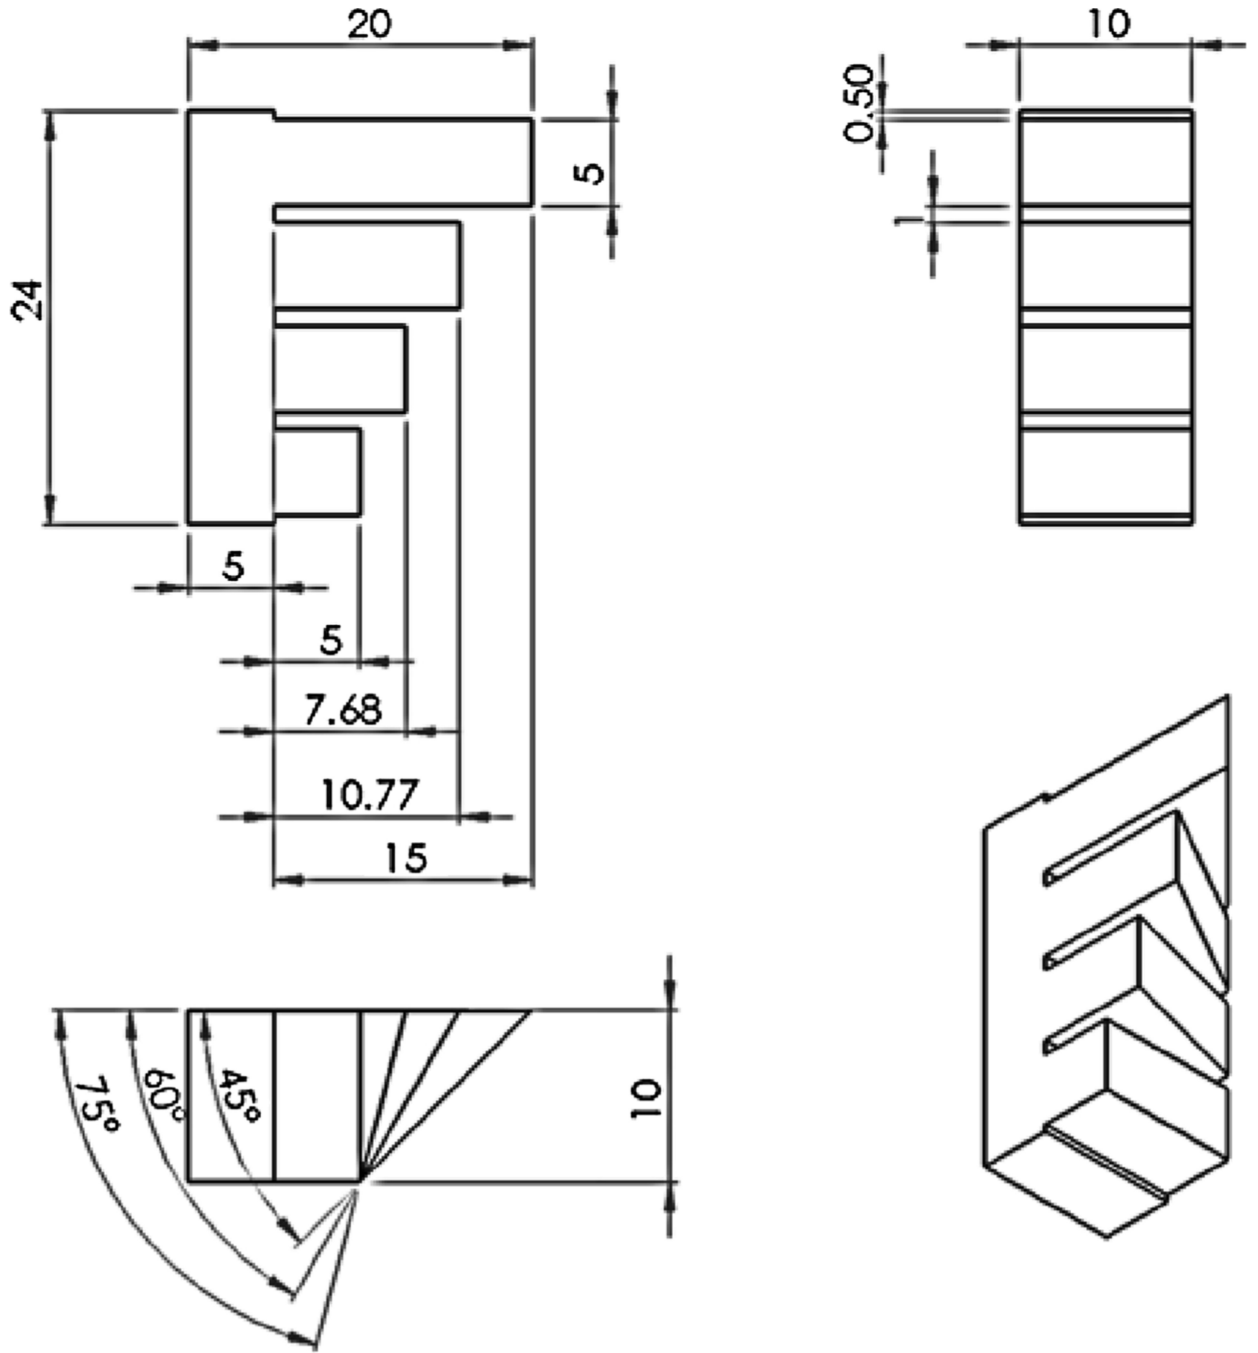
Test part design. The part has four connected overhanging wedges with width 5 mm, height 10 mm and angles of 45, 60, 75, and 90 degrees respectively. Dimensions are in millimeters.
